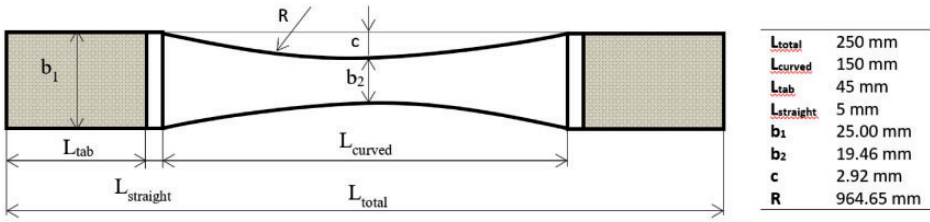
Geometry of a dumbbell-like shape tensile test specimen.
